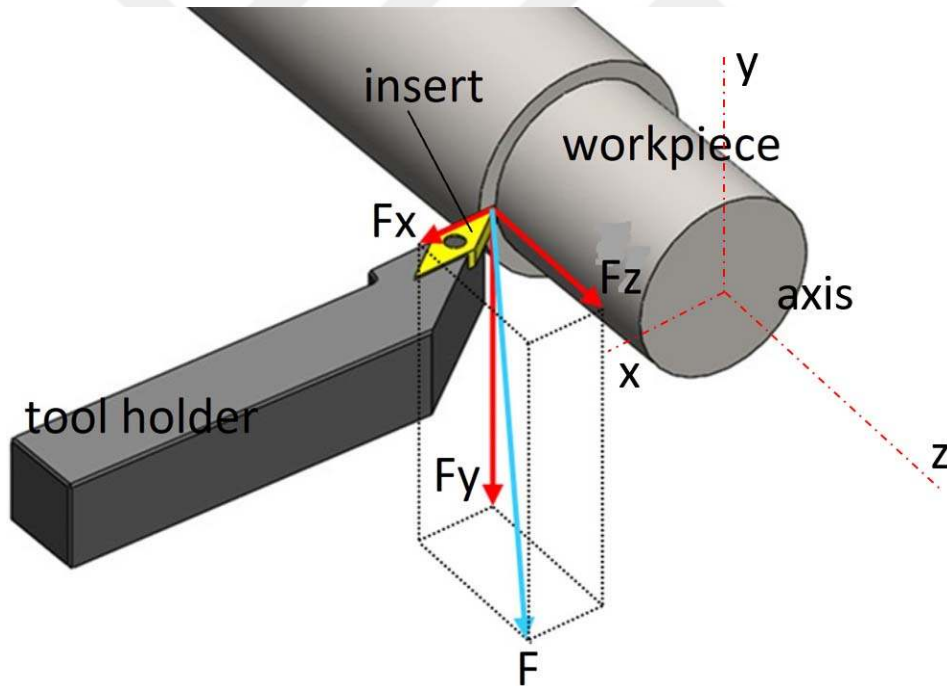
Cutting forces on the symbolic cutting tool (insert)
